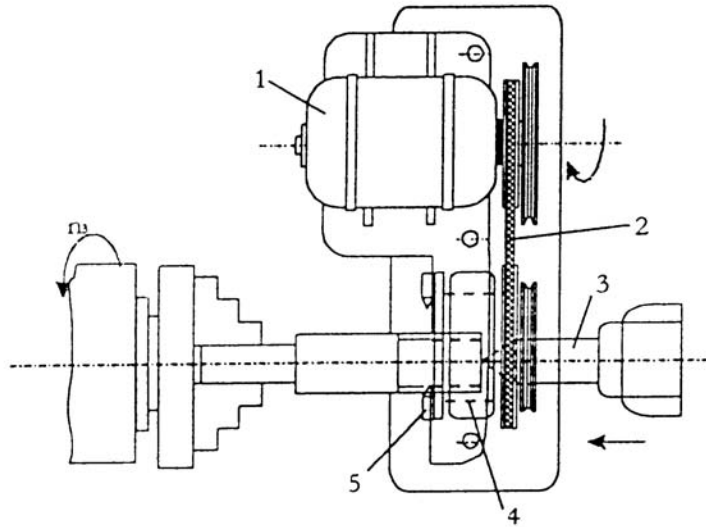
Scheme of device (1- electric engine, 2- transmission belt, 3- dead centres, 4 -bearing, 5- cutting head)
